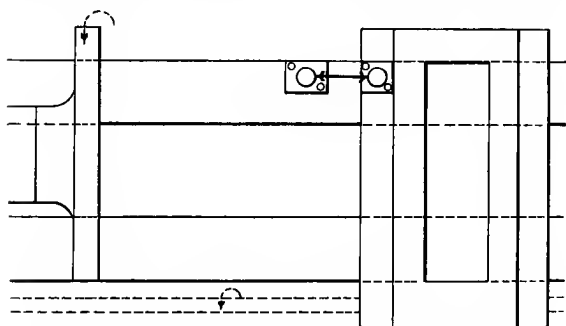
Diagram illustrating lathe lead-screw tests.
